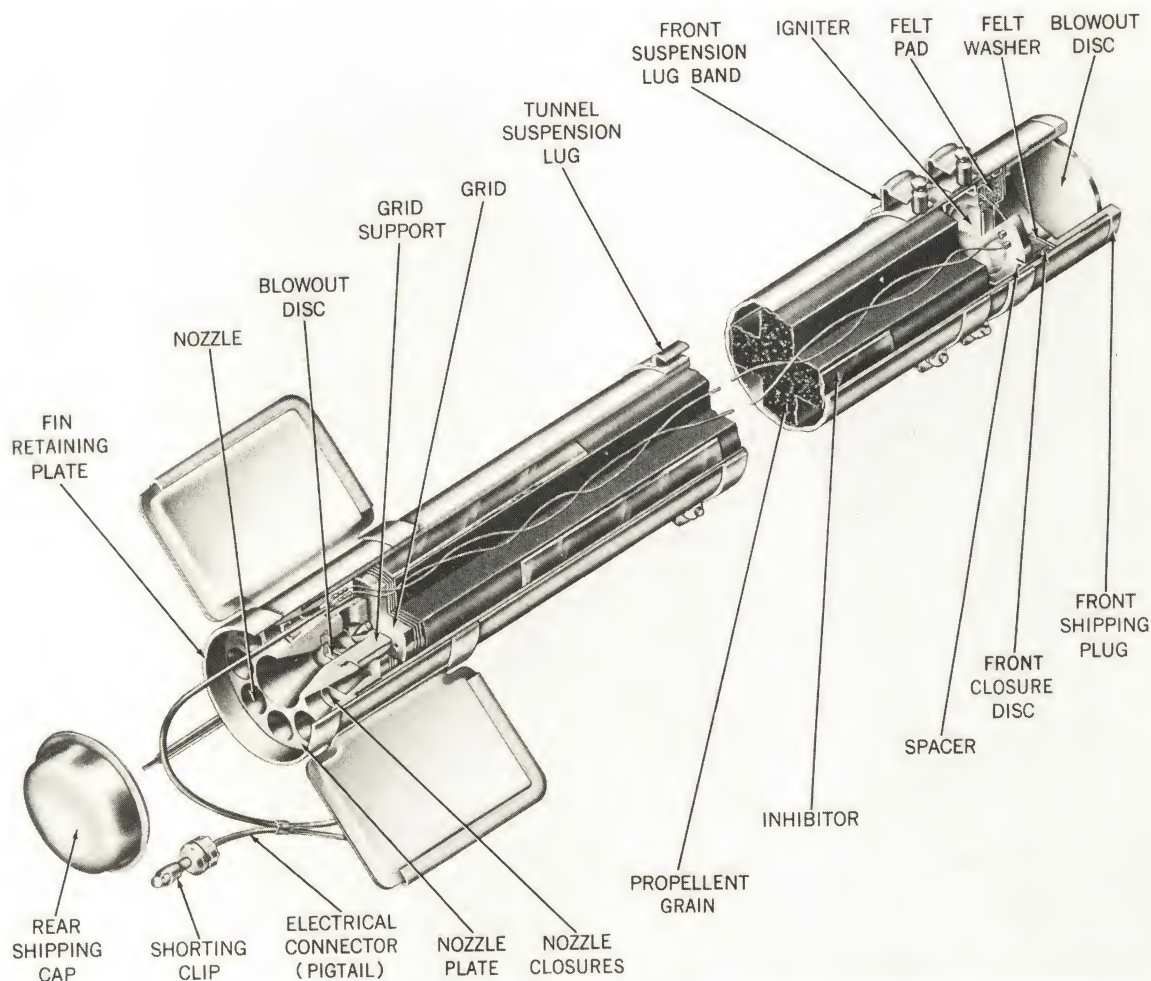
Typical Aircraft Rocket Motor, Sectional View.
